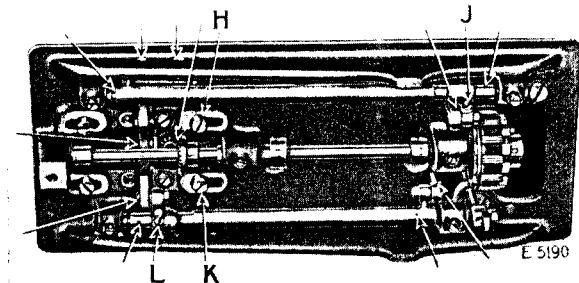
OILING POINTS IN THE BASE OF THE MACHINE
